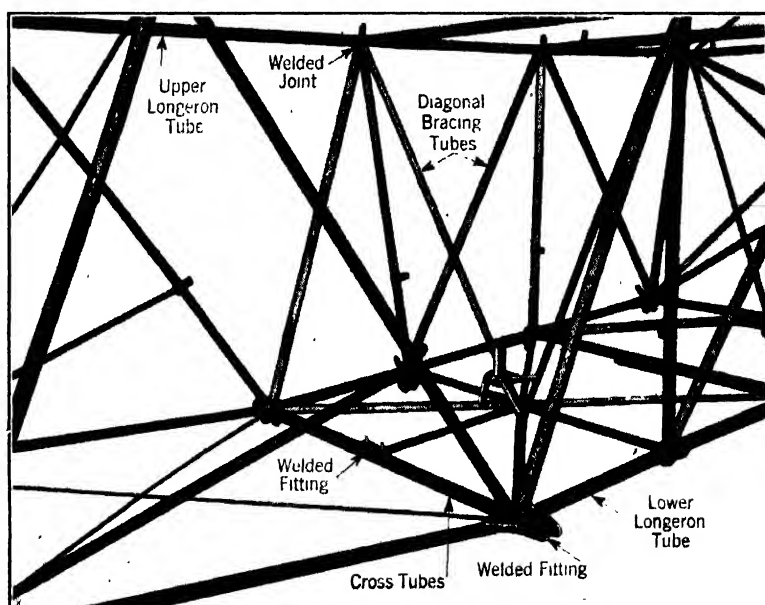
Tubular Steel Construction with Flame Welded Joints Used for Fuselage of Pitcairn Orowing Biplane.
